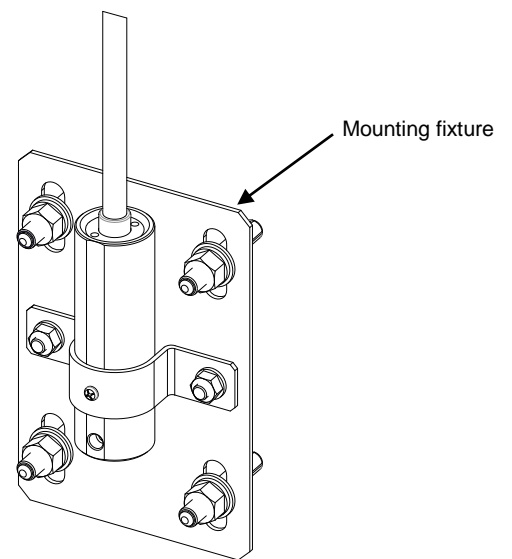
Example of installing a Pressure Level Gauge (Option: Mounting Fixture)
